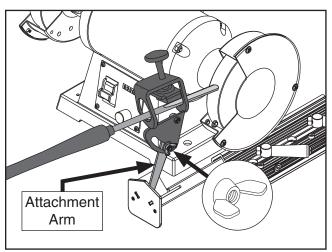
Gouge installed in attachment and positioned against grinding wheel.
